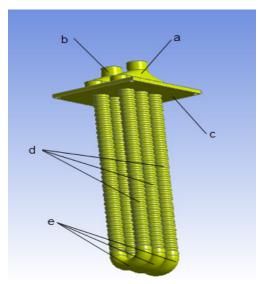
Configuration of A type. a: inlet EGR chamber; b: outlet EGR chamber; c: Clapboard; d: Wave's tube; e: Smooth U type tube
